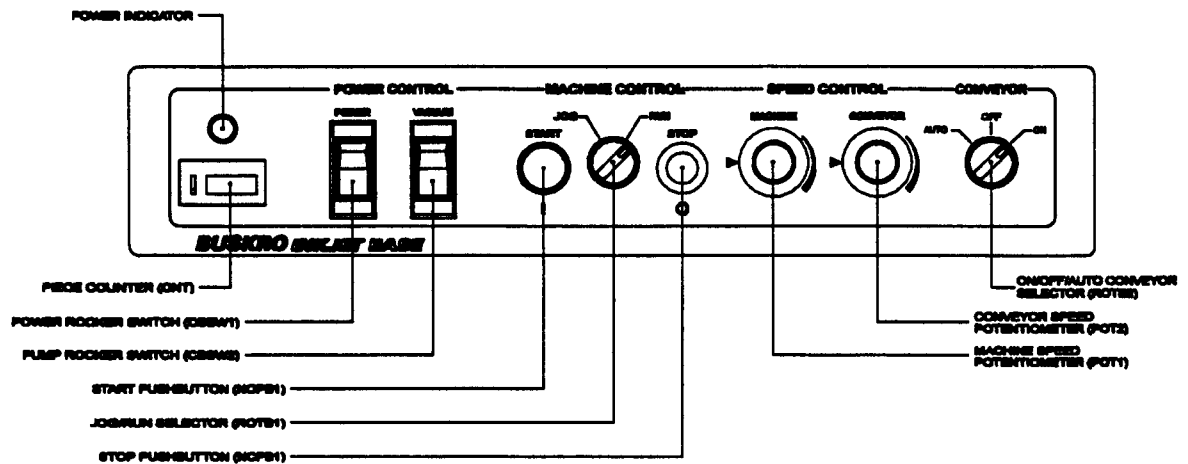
Instrument Panel Control Illustrating Power Switches, Speed Potentiometers, Machine and Conveyor Control Pushbuttons, and a Resettable Piece Counter.
